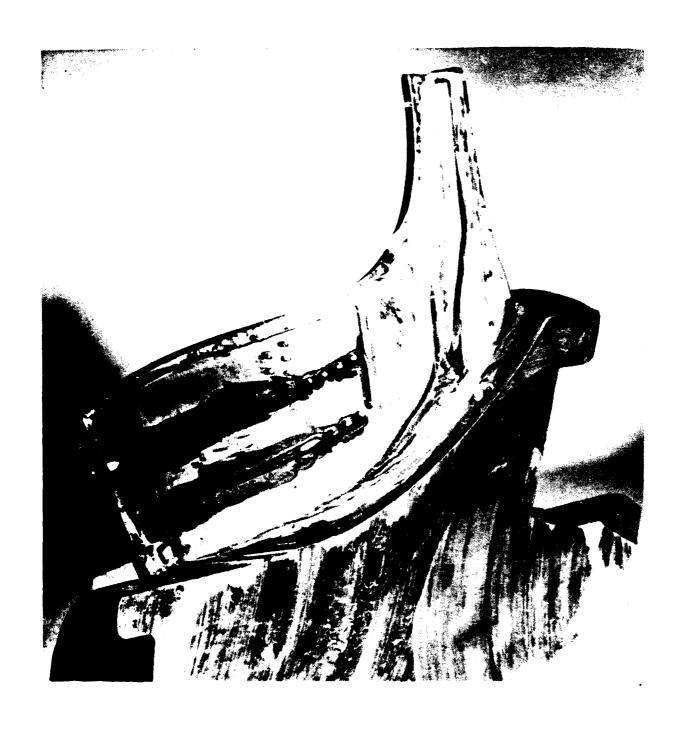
SECTIONED CASTING, SUCTION SIDE
